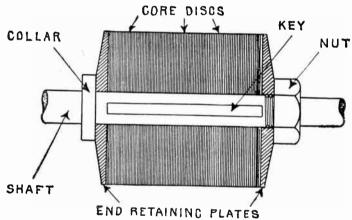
Sectional view of laminated smooth core armature showing end plates, flange and retaining nut. A key is provided to prevent rotation of the core with respect to the shaft.
